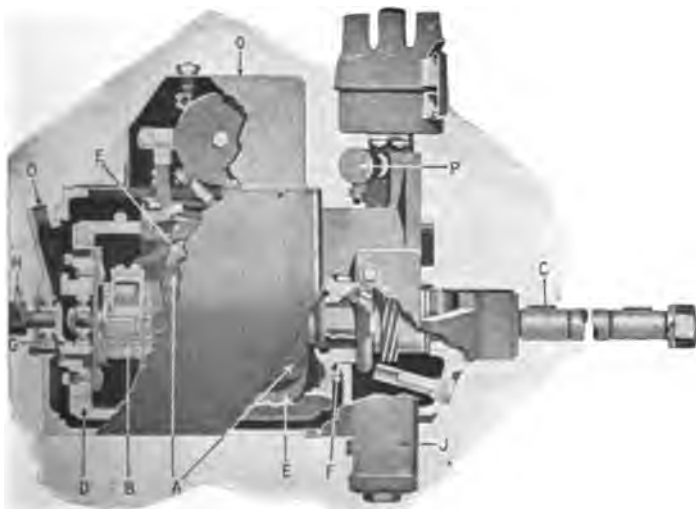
A—Side view of generator on Remy apparatus used on the Moline-Universal tractor
